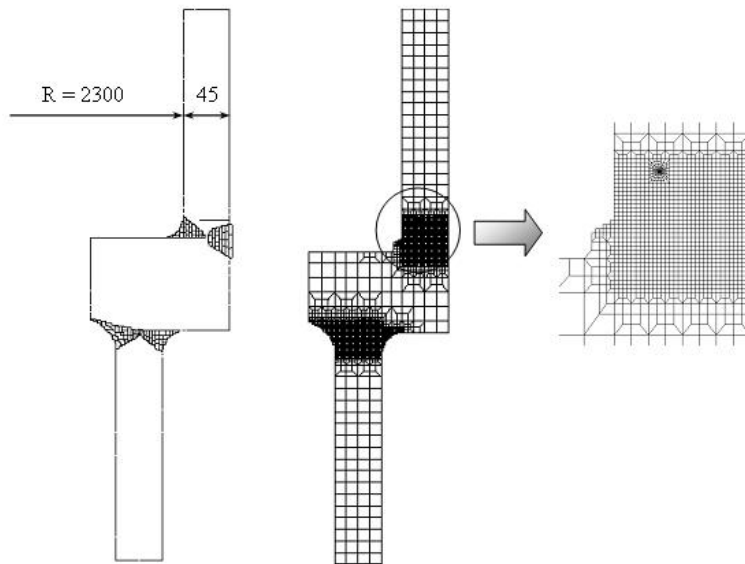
Geometry of the core shroud with weld passes and finite element mesh
